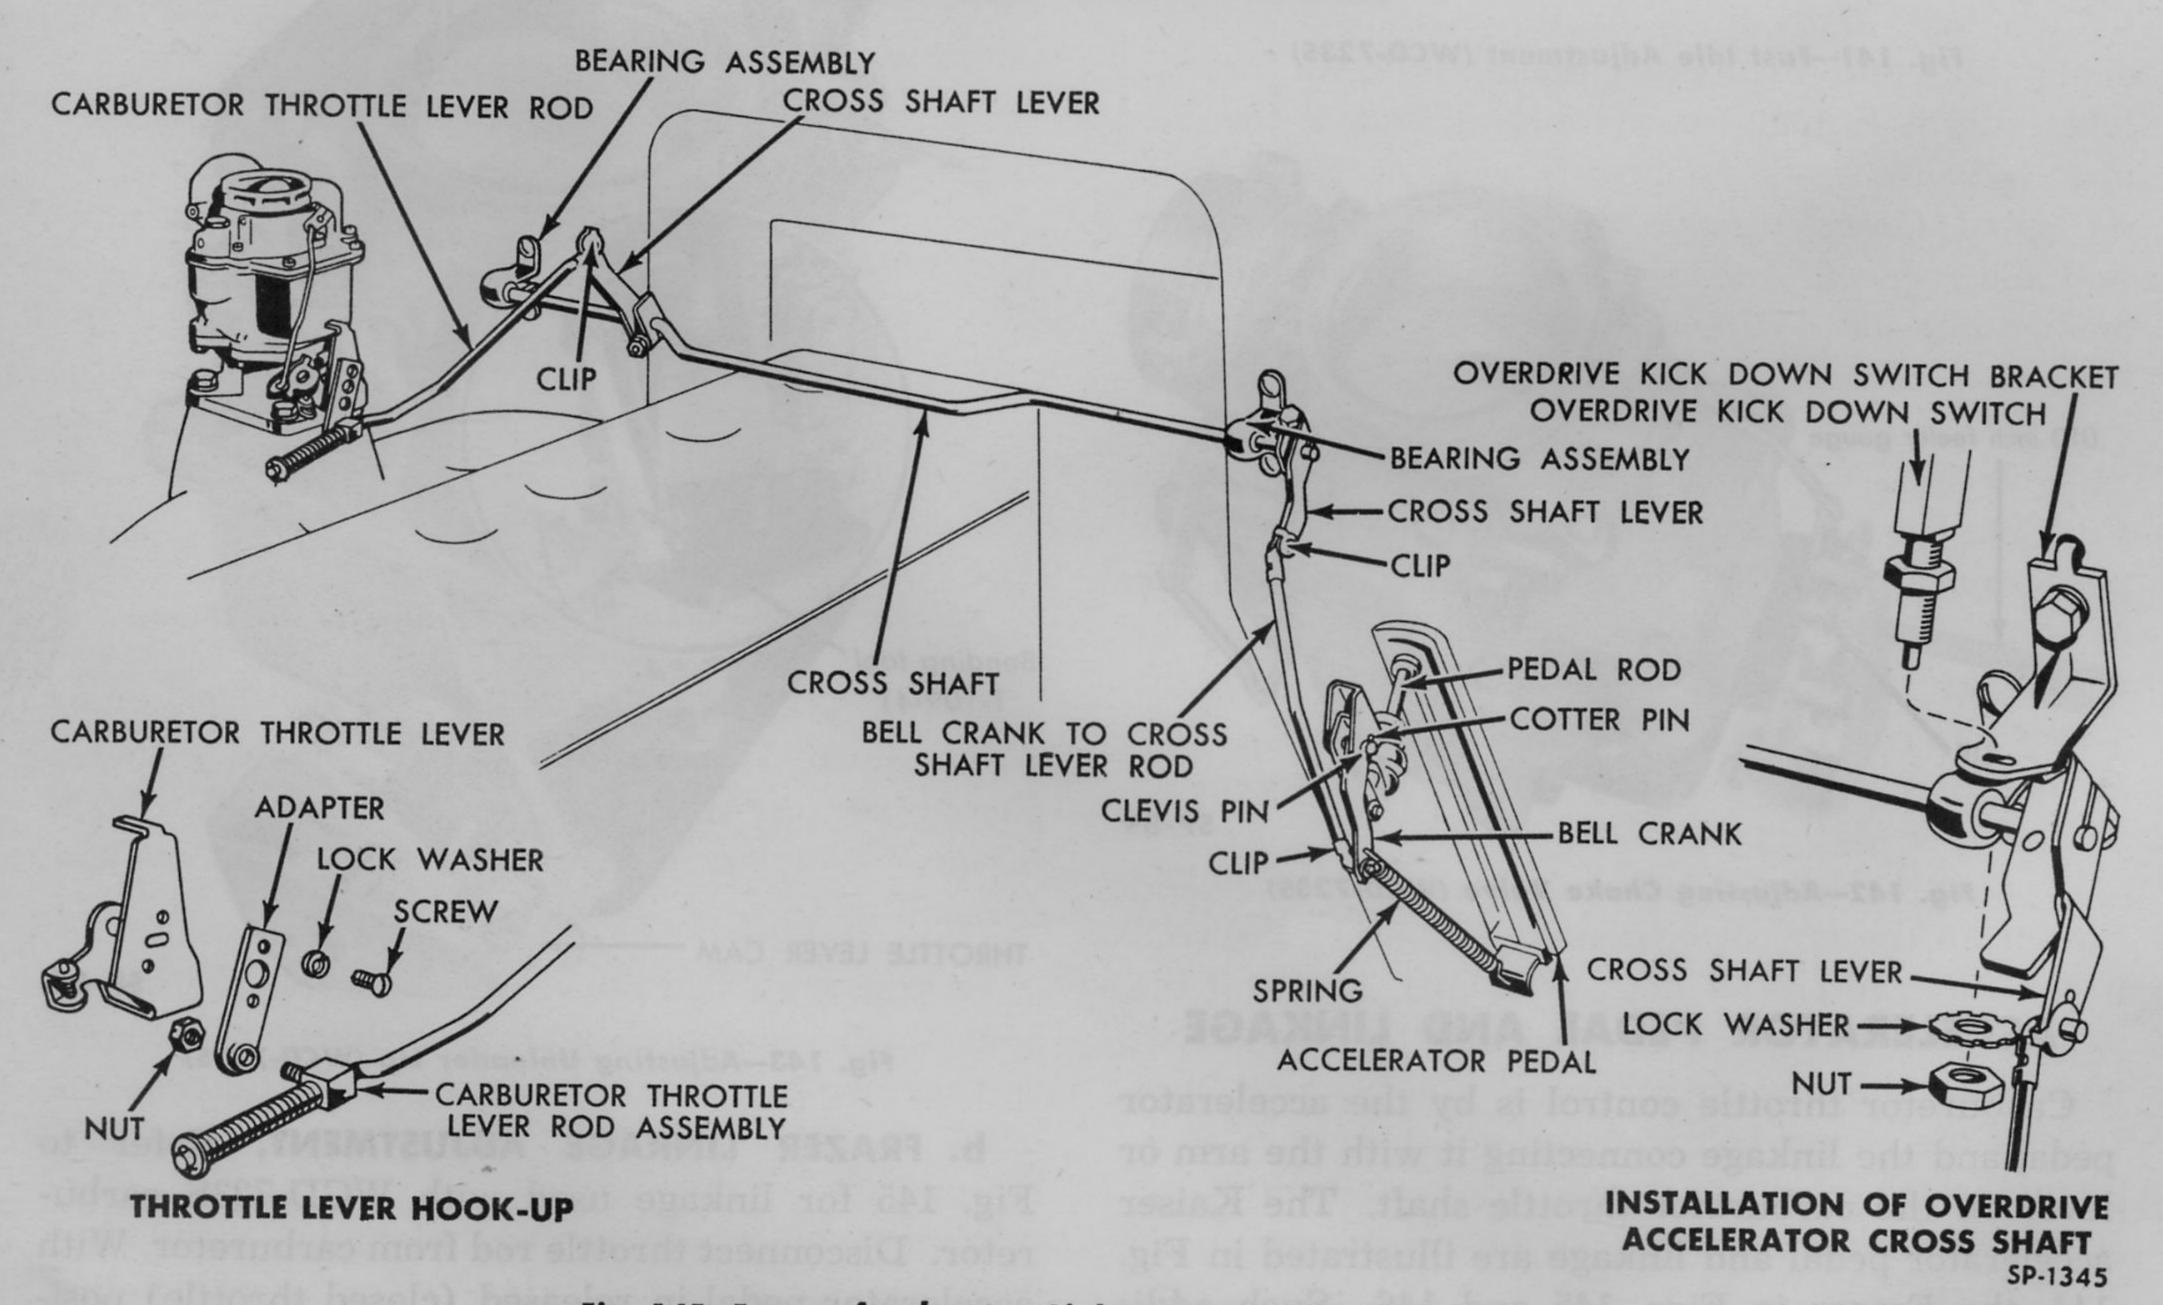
Frazer Accelerator Linkage with WCD-723S Carburetor
